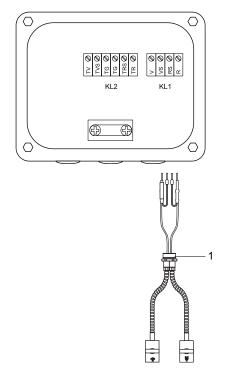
Connection of the transducer cable with stainless steel conduit and stripped ends
